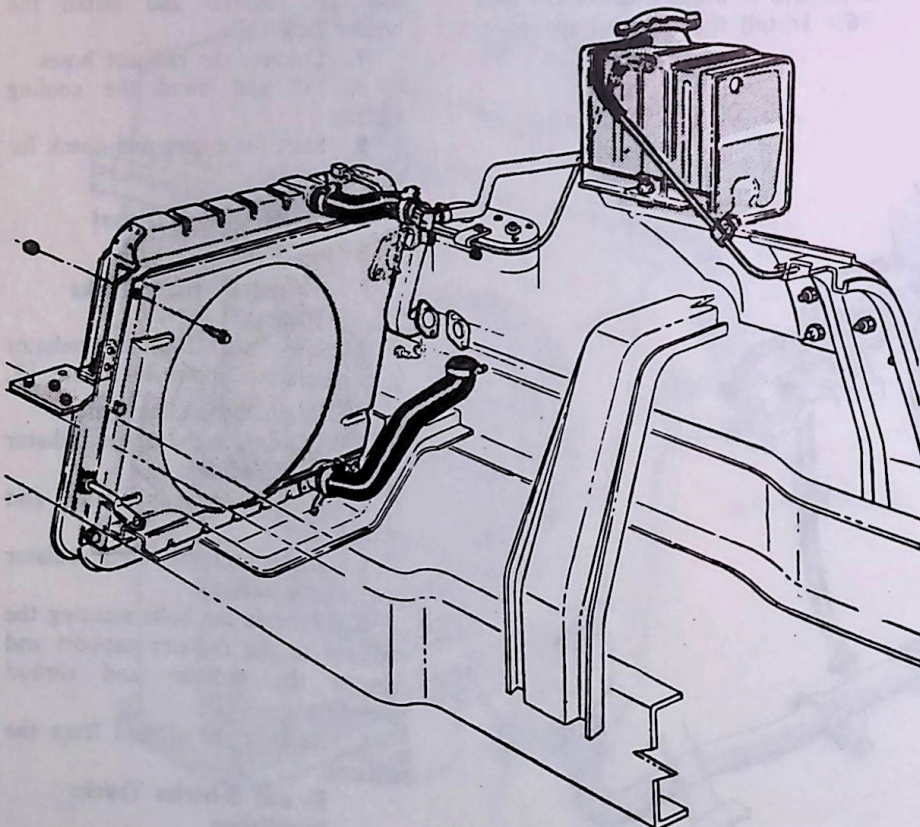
C-Series Radiator Installation— Ford V-8 Diesel Engine
